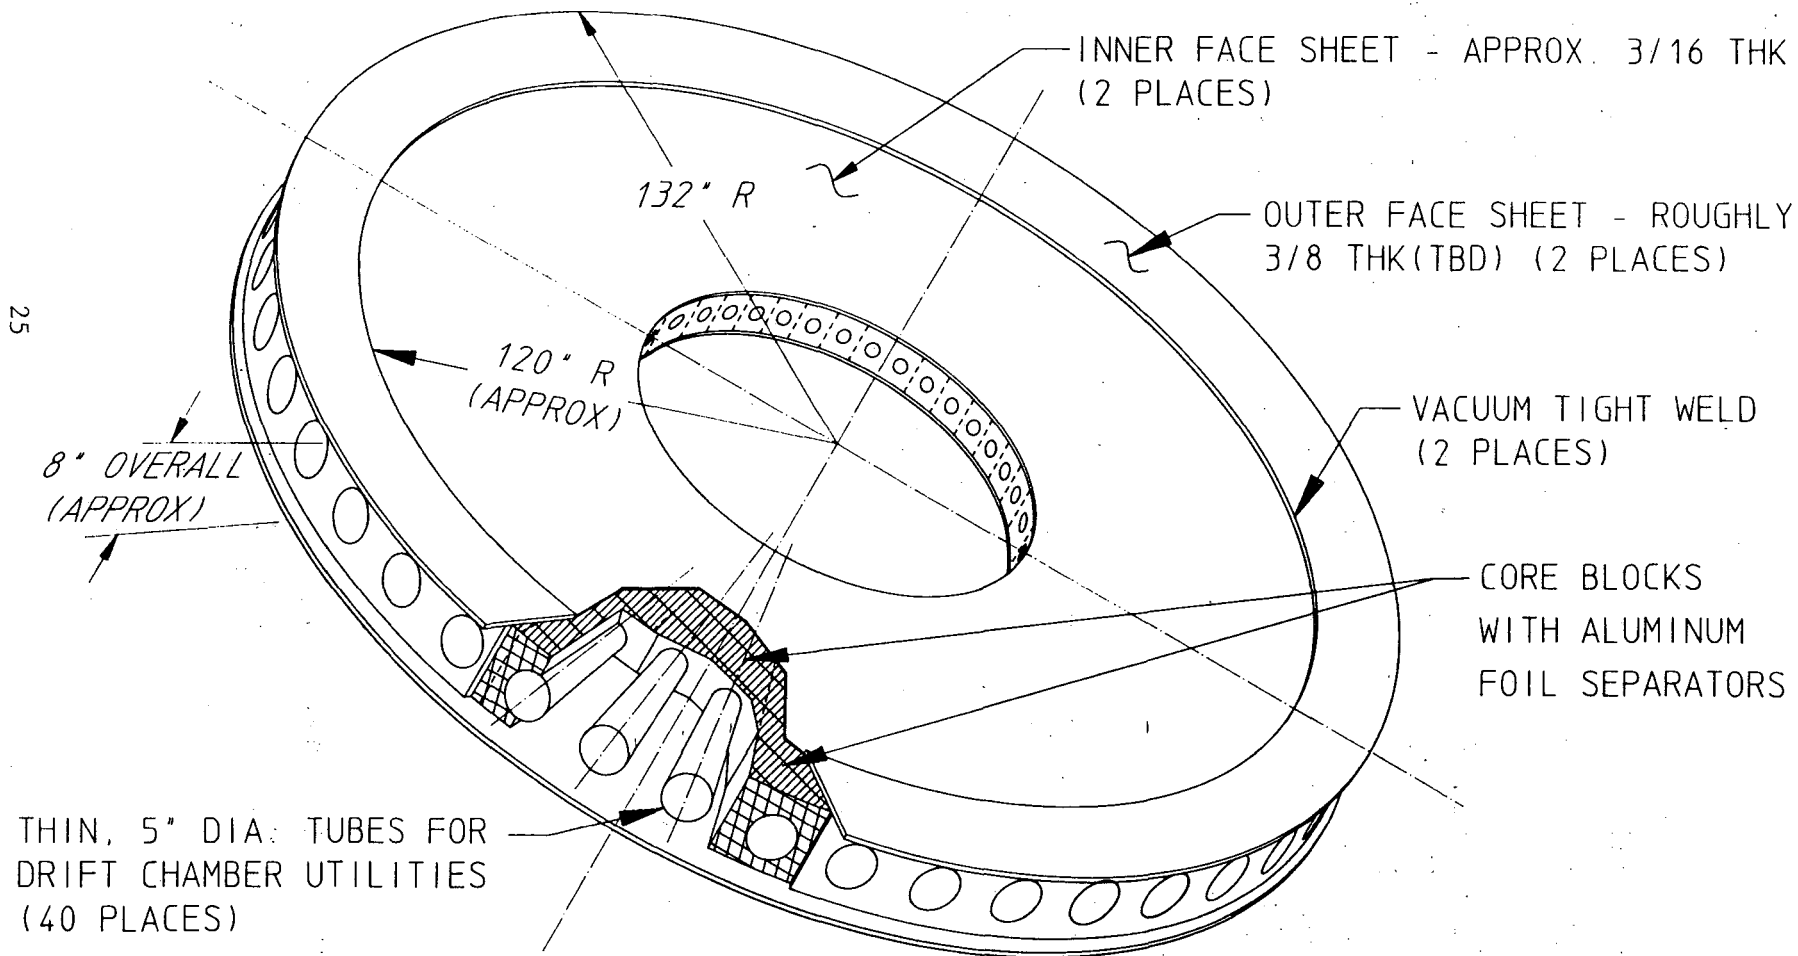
CONCEPTUAL SKETCH OF BASELINE DESIGN COMMON VACUUM BULKHEAD WITH THIN 5083 ALUMINUM FACE SHEETS AND FOAMED ALUMINUM CORE (BRAZED CONSTRUCTION; INNER RADIUS DETAILS NOT SHOWN)
